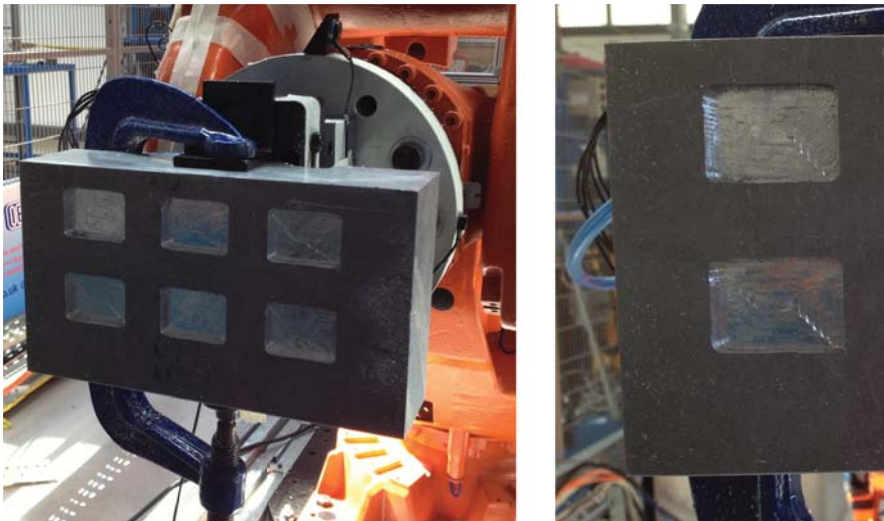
Pockets milled by robot using a PowerMill generated tool path.
